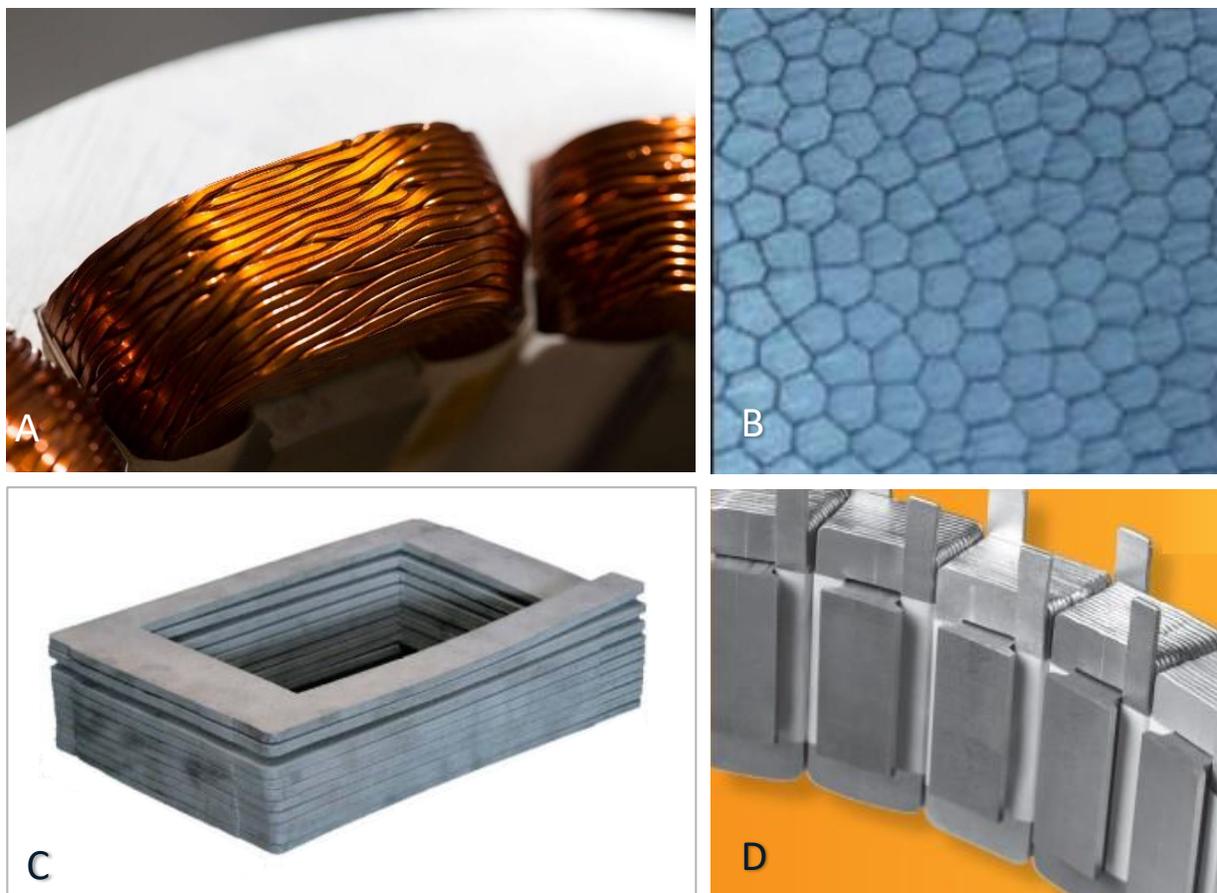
A: Compressed aluminum stator coil (AEM UK), and B), B: cross-section of the compressed aluminum coil, Cand D: die-cast aluminum coils C and D
